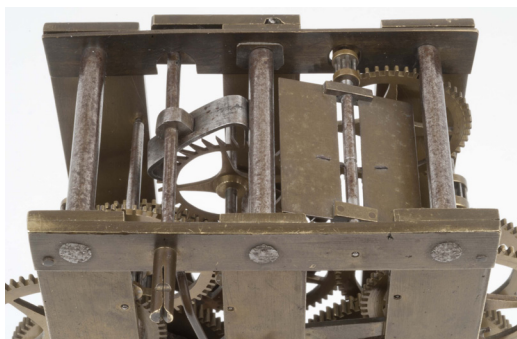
(left). An angled view supplying a top rear detail of the movement and showing the three upper pillars that join the rear strip plates together as well as two corner pin rivets. Note the front strips assembled onto the three pillar ends as well as the small rectangular packing piece on the centre pillar (probably necessary because the pillar was made too short). There is also a good rear view of the pallet arbor cock..
